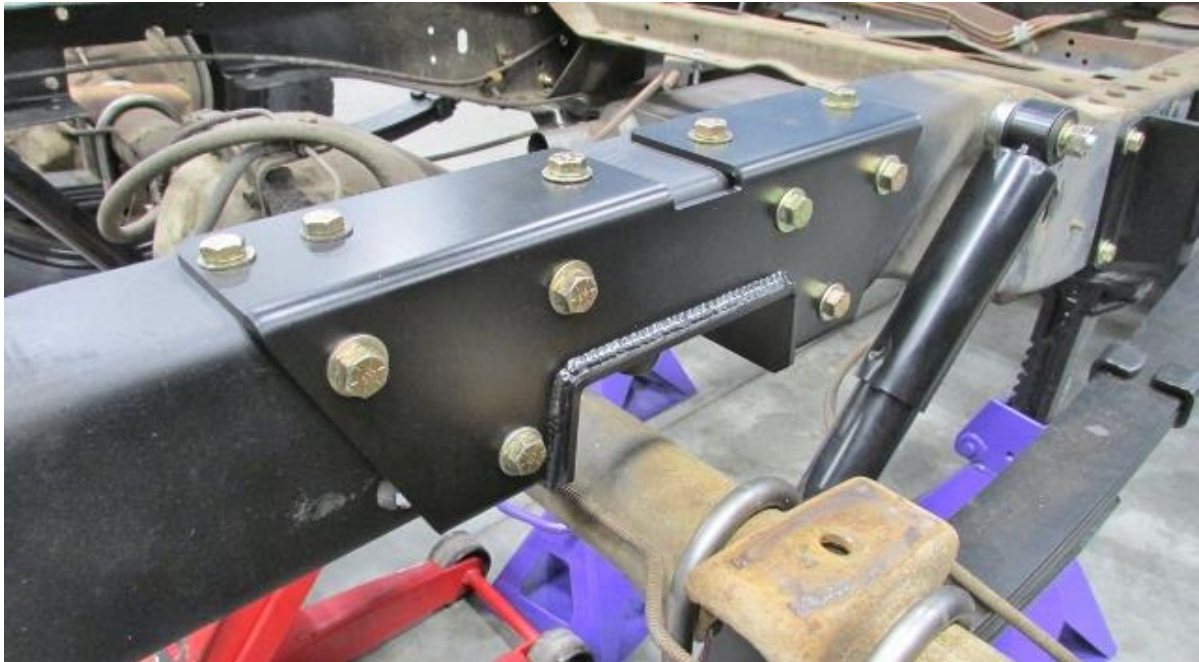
Install Frame Notch Assemblies (RH, Passenger Side)
